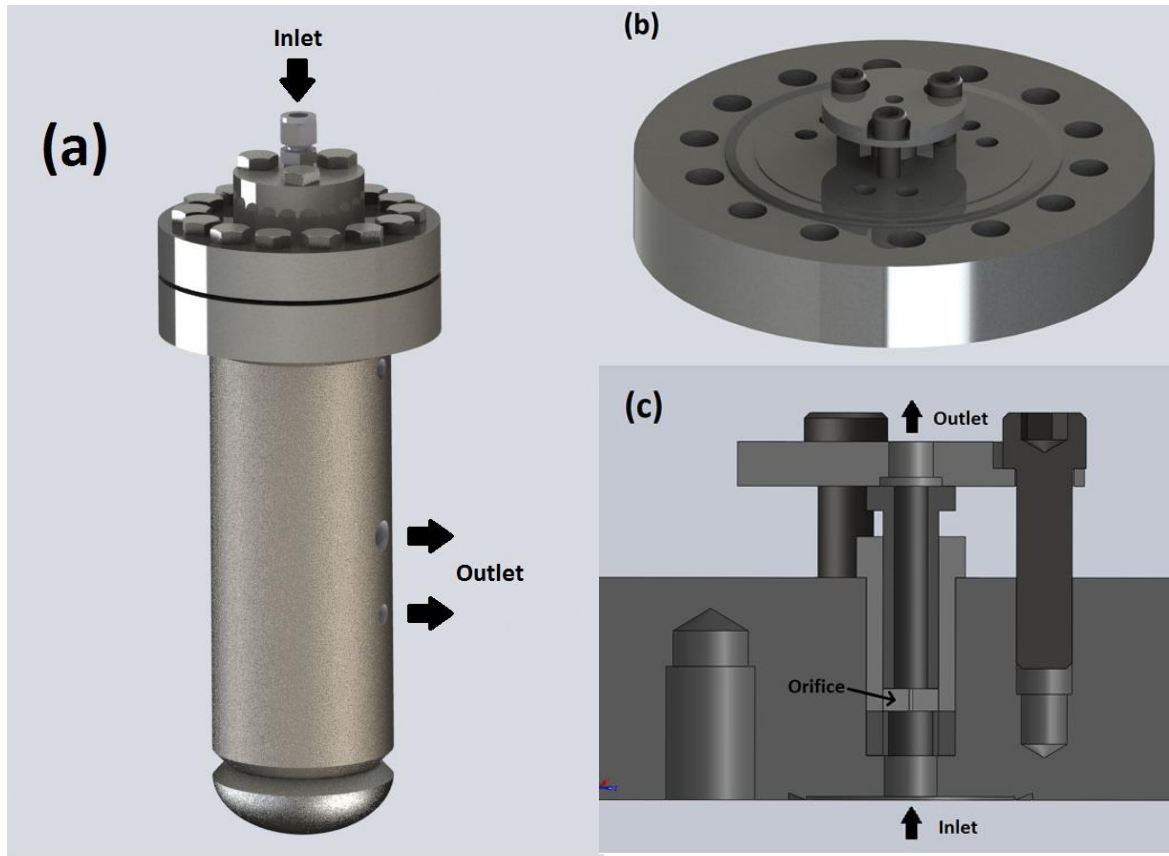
Images of the (a) full test section, (b) upper flange of test section, and (c) section of upper flange in which orifices are secured. Orifices used for testing had diameters of 1 mm and lengths of 3.2 mm, 5 mm, and 20 mm. See Table 4 for precise measurements of the orifice dimensions.
